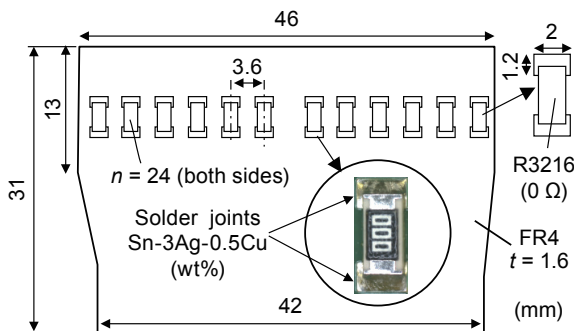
Sample test component used to evaluate thermal fatigue damage in solder joints.
